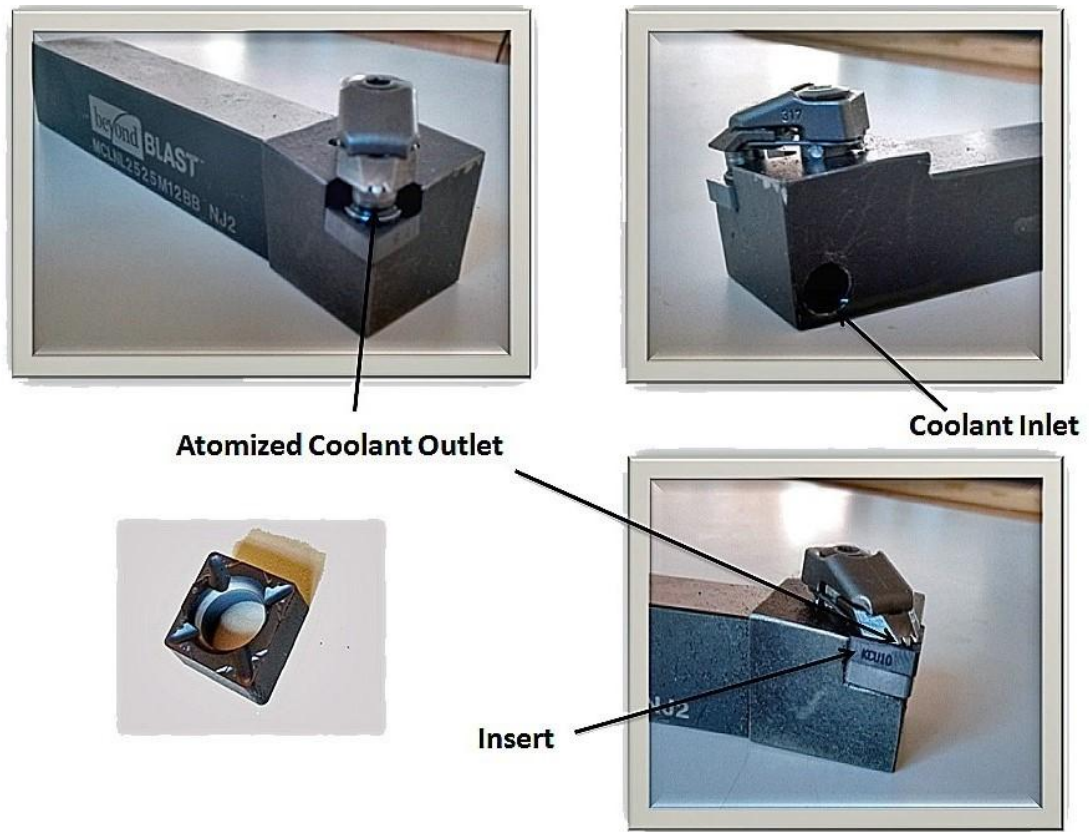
Tool holder and inserts used for turning Inconel 718
